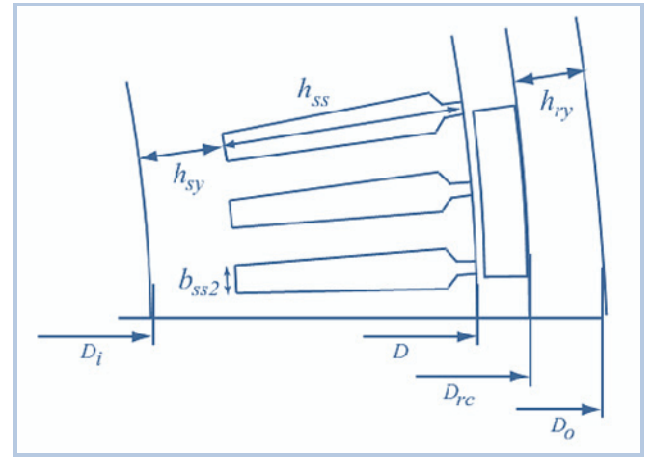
Basic dimensioning of outer-runner rotor BLDC motors.
